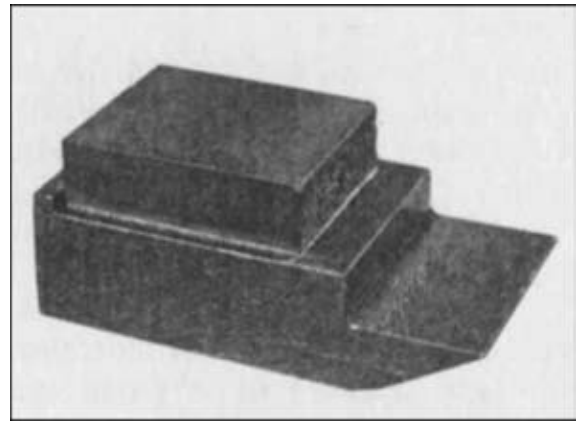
Appearance of the part from diffusion-welded hard alloy VK6 with steel U8
